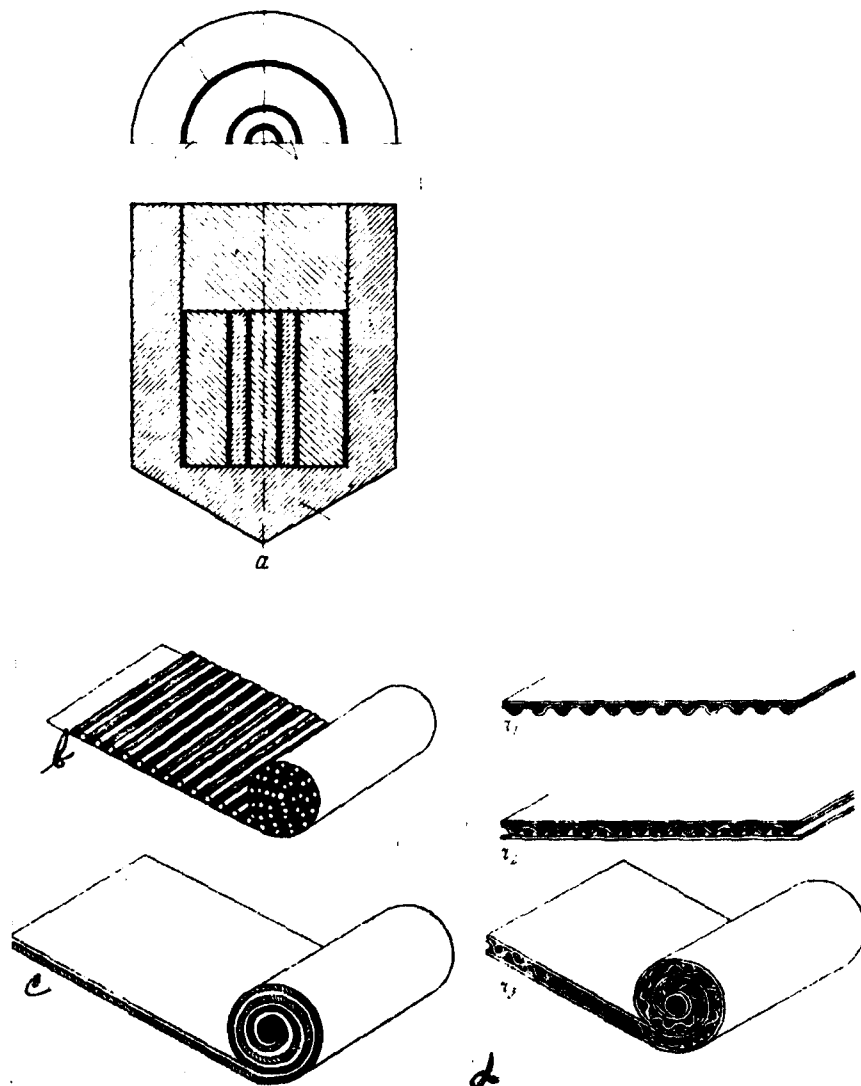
Diagram of Assembly of blanks for Production of Composite Materials by the Extrusion Method
